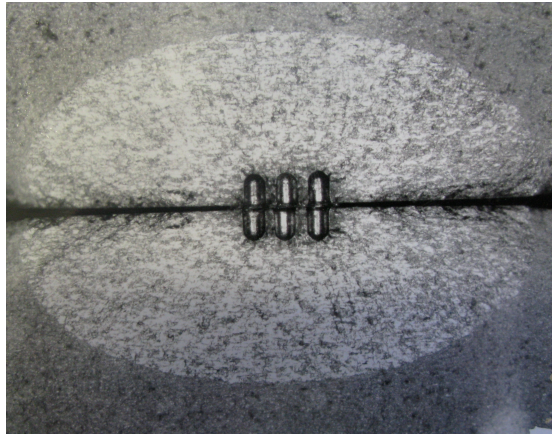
Optical photograph of a fatigue crack which was broken open to reveal the crack aspect ratio. The two halves of the specimen have been placed back-to-back. The surface crack length for this crack was approximately 0.32 inches.
